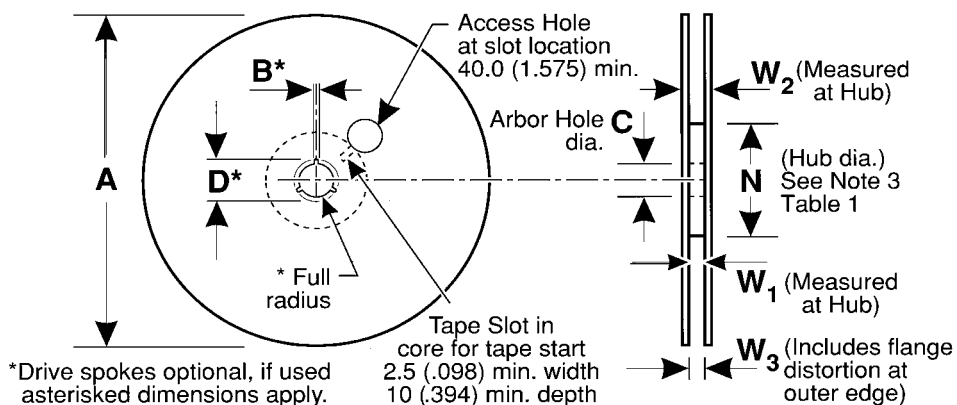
Reel Dimensions (Metric Dimensions will govern)
